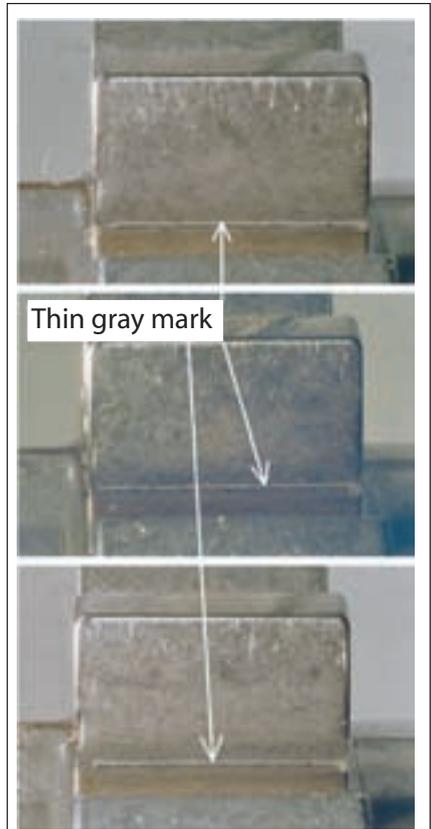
Picture of three teeth on the superfinished pinion after test run 2 (load stage test and endurance test) showing a thin gray mark that was attributed to the gears not having any tip relief. The gears show no micropitting.
